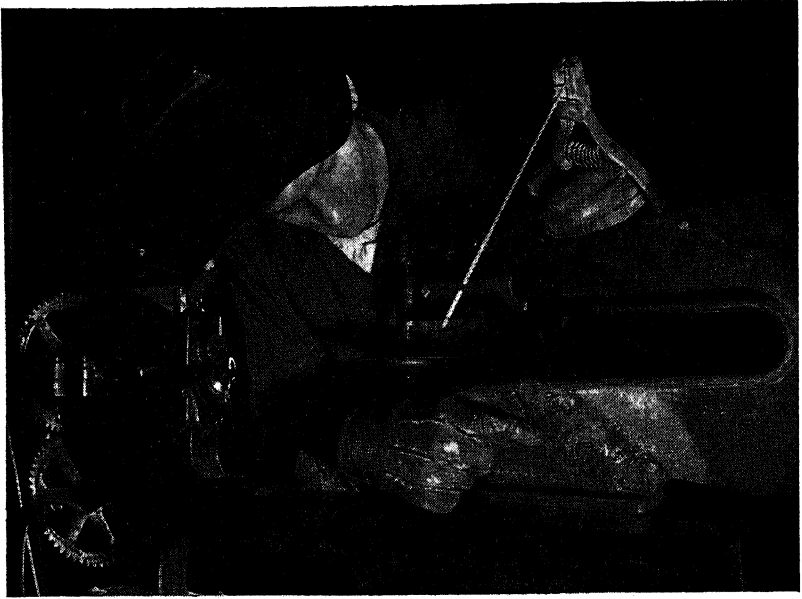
Cast iron frame of circular shear. Break was vee'd out and welded by the conventional cast iron procedure, (see Page 326), keeping casting as cool as possible.
